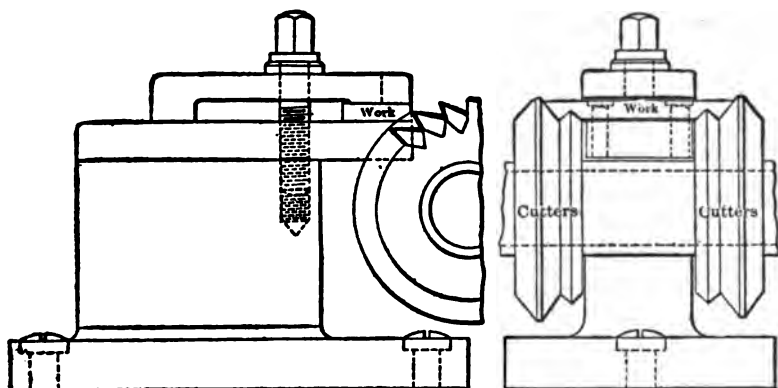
Another Fixture for Holding the Work Shown in Fig. 30
